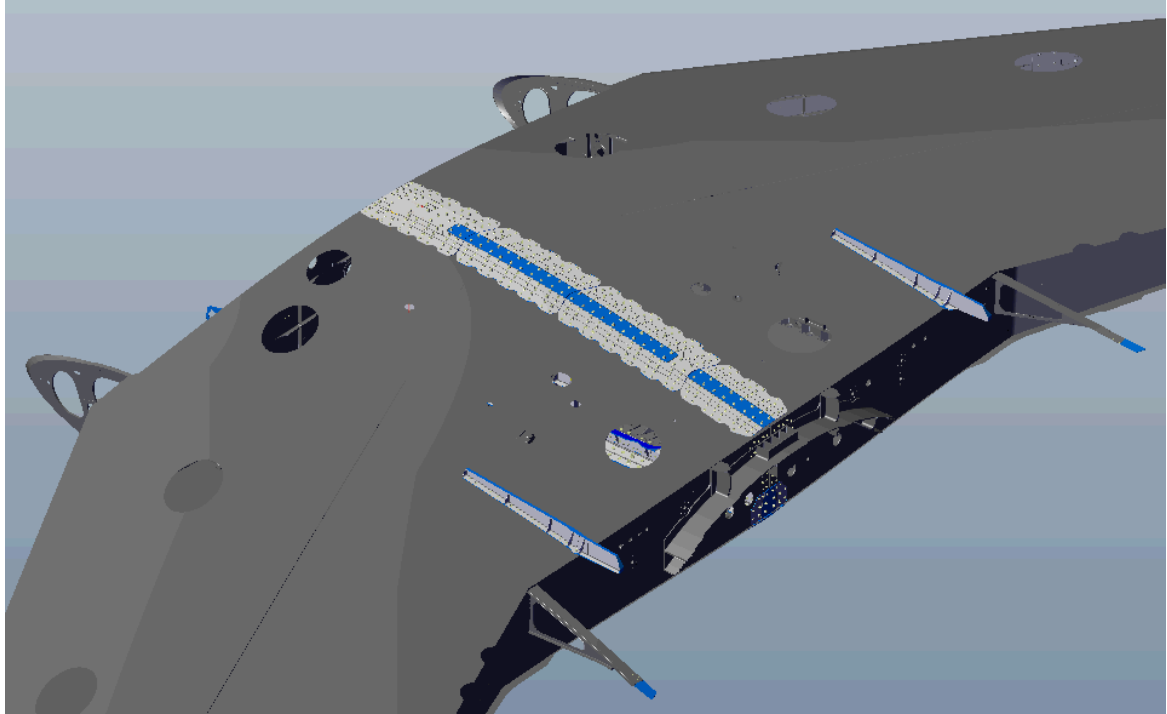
Wing-to-wing assembly through the use of fasteners. Source: EMBRAER, 2018.
